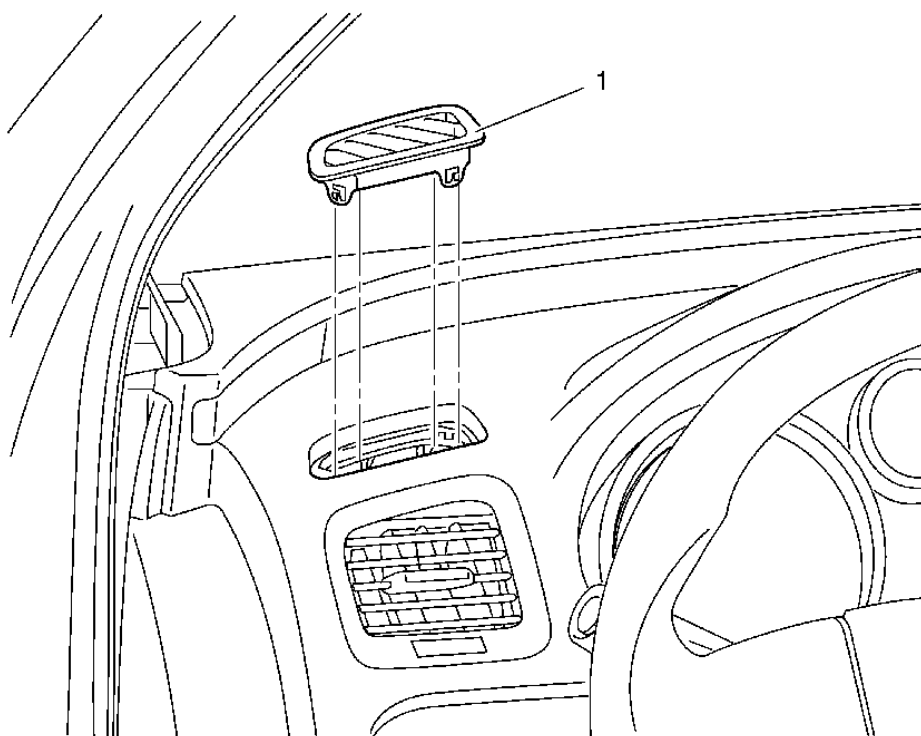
Side Window Defogger Outlet Grille - Left Side
